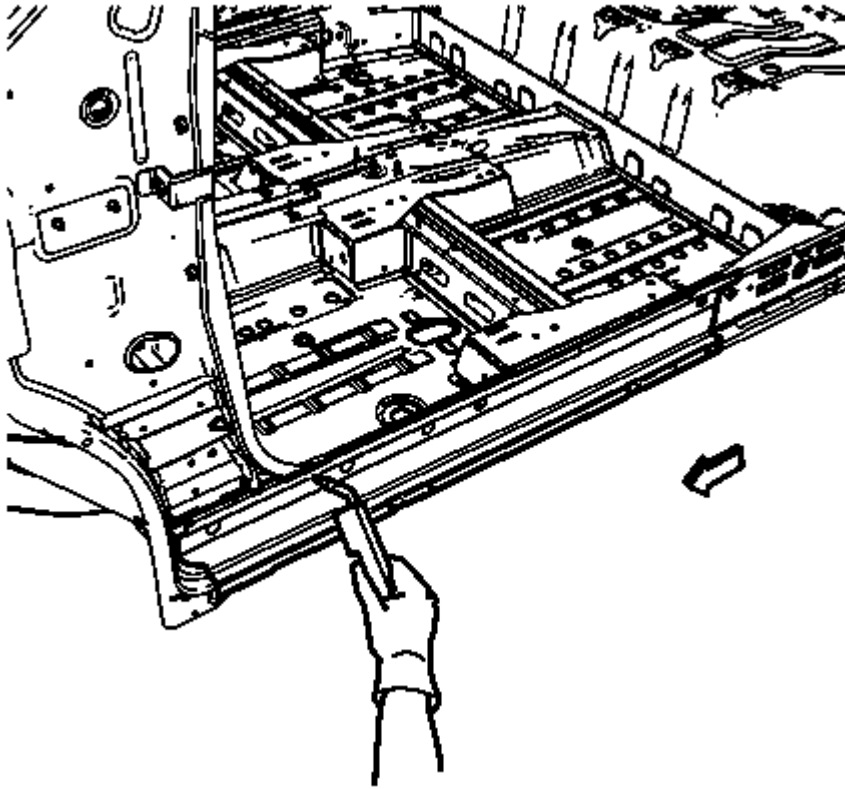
Applying Sealers And Anti-Corrosion Materials
